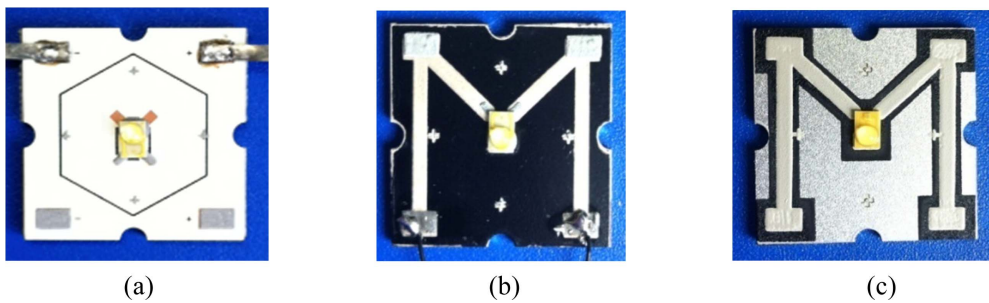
Fabricated prototype single chip mounted LED packages for comparison of thermal resistances: (a) conventional FR-4 MCPCB, (b) ceramic-metal PCB covered fully with glass-ceramics, and (c) ceramic-metal PCB covered partially with glass-ceramics.
